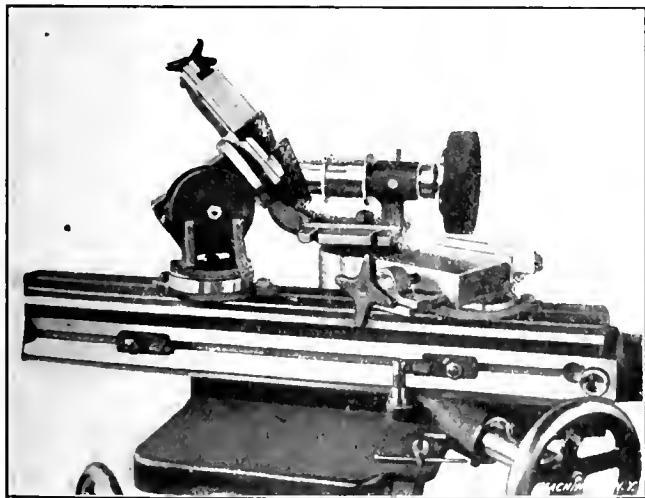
Three-swivel Mounting for Vise, permitting Universal Adjustment
